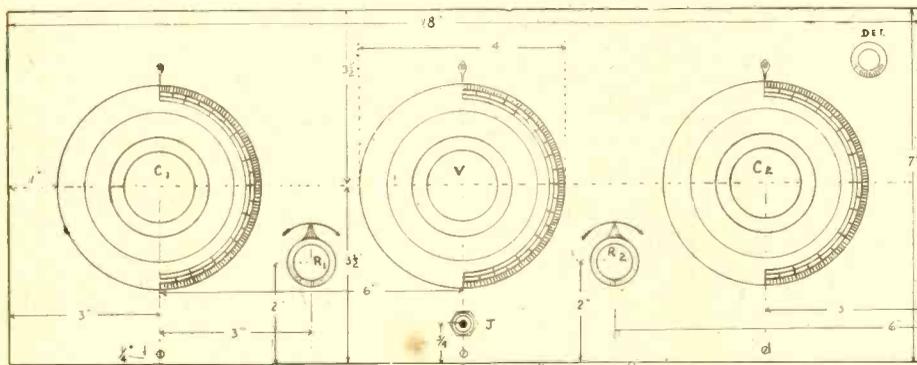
(top), the panel layout, and Fig. 3, the assembly plan.
